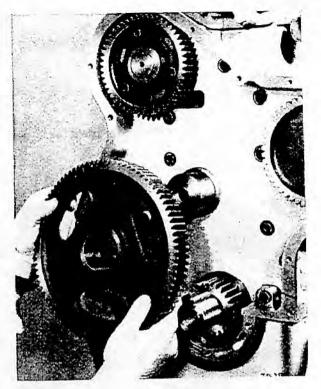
REMOVING IDLER GEAR FROM SPIGOT
